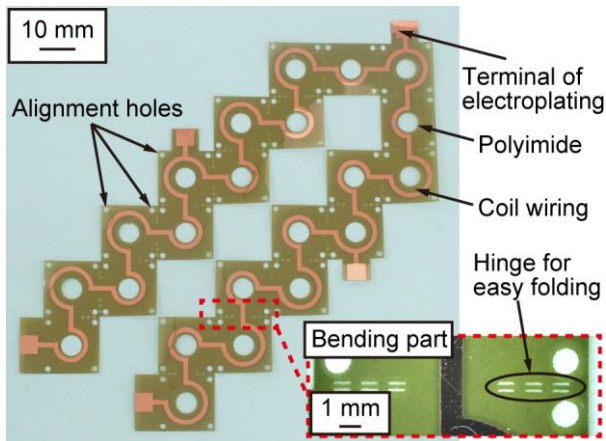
Photograph of the folded multilayer micro coil wiring.
